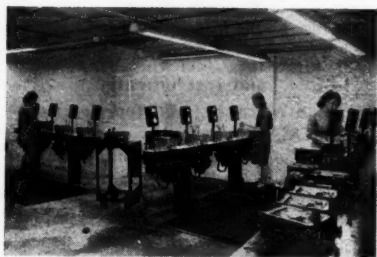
The lighting over these test benches is arranged to give excellent uniformity, without glare, enabling the meter scales to be easily and clearly seen.
